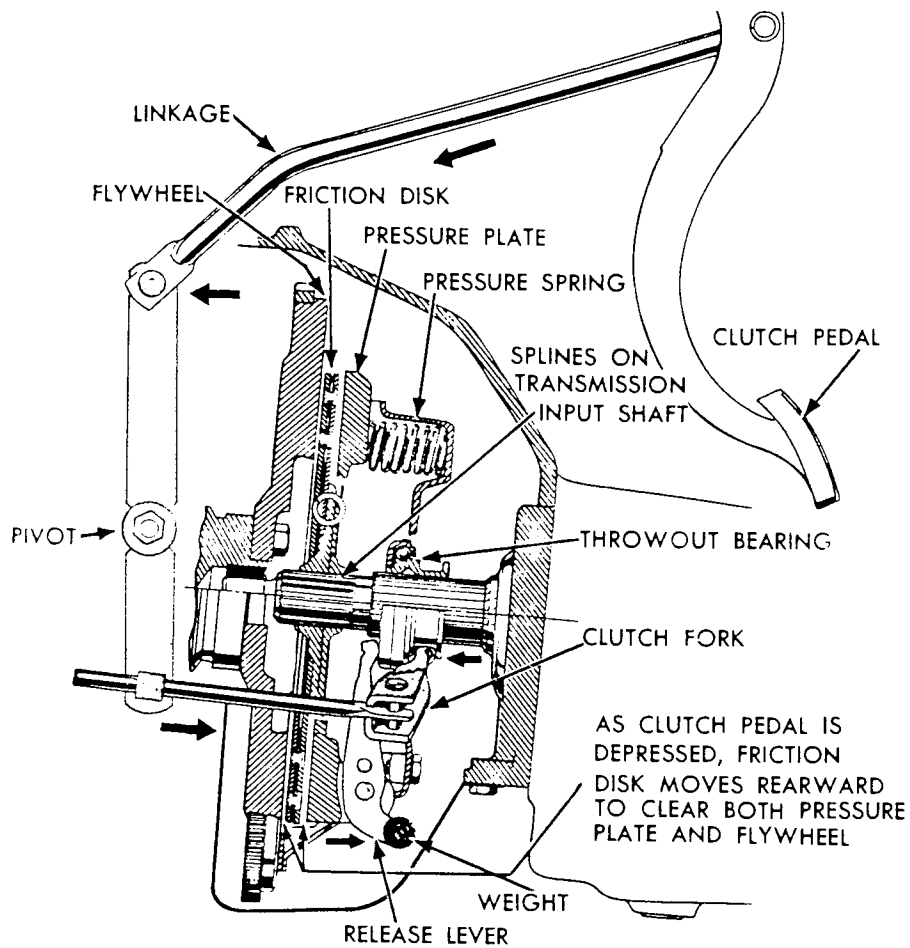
Sectional view of a clutch with the linkage to the clutch pedal shown schematically.
